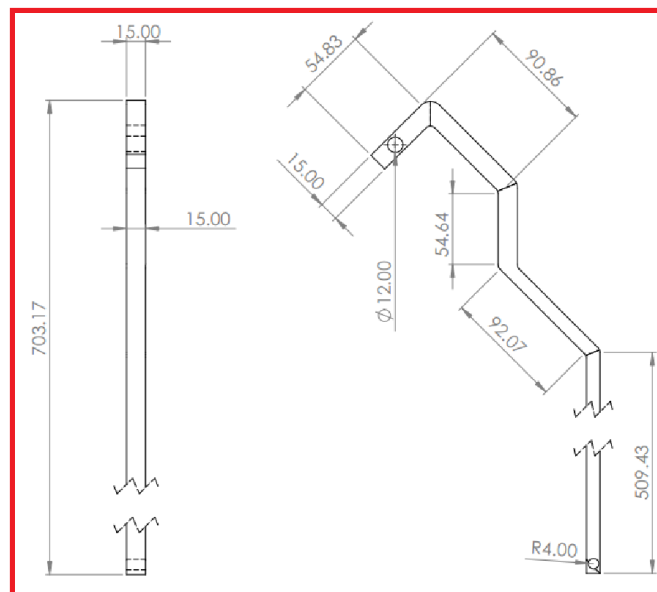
Wheelbase Adjusting Rack with Nearside Connector: Geometry and Dimensions (mm)
